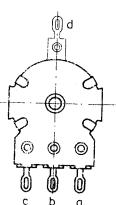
Single potentiometer with mounting bushing. For dimensions d and L, see Spindles.
